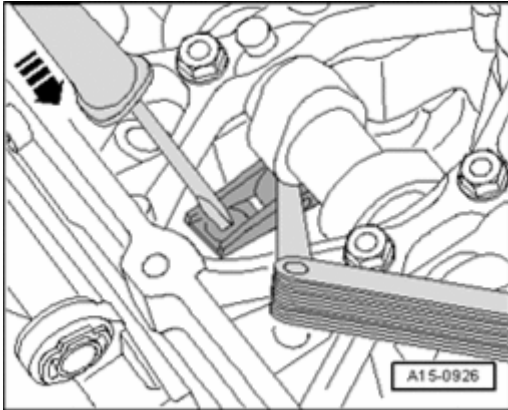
Checking Play Between Cam Lobes And Roller Rocker Lever
